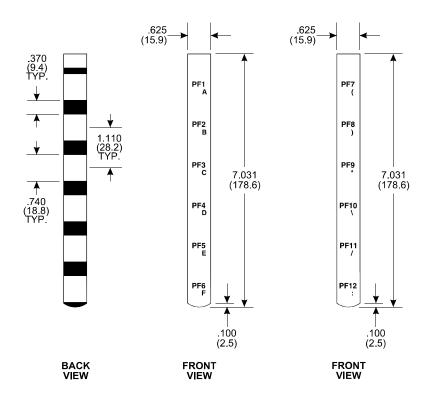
3410KP/3412KP PF1-PF12 Insert Dimensions
